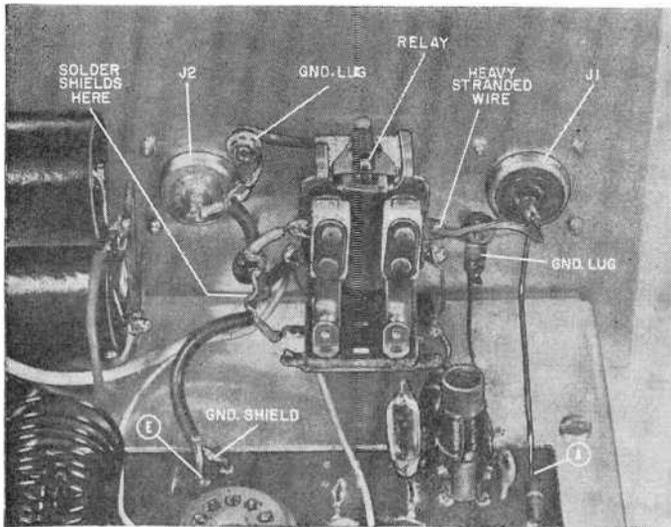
Be sure to use heavy stranded wire from J1 to indicated relay terminal, and solder the cable shields together to insure common ground throughout.
